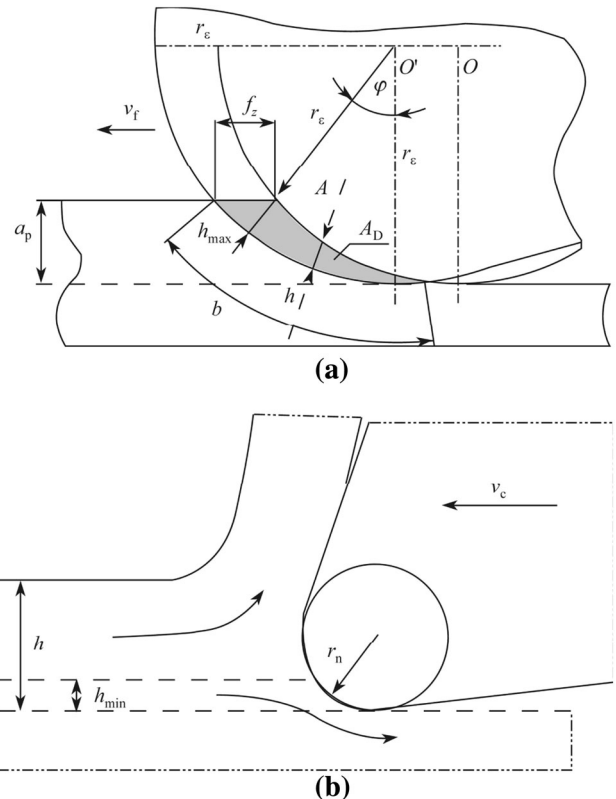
Chip formation model including minimum uncut chip thickness during arc-shaped immersion of tool into the workpiece
